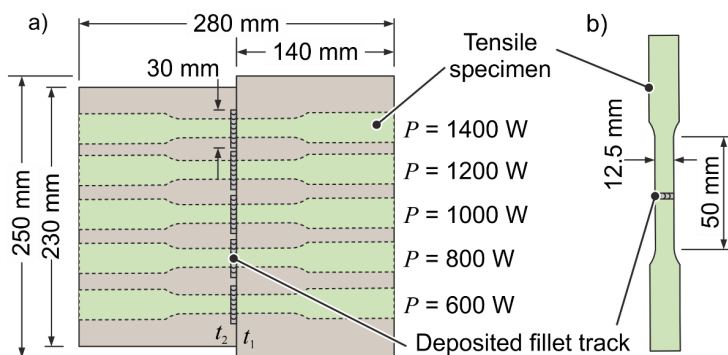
(a) Deposition step up and laser cut of tensile specimen, (b) dimension of tensile specimen
